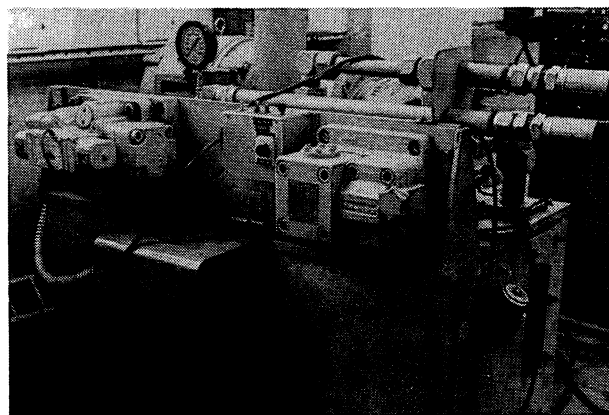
Crosscut shearing assembly; (a) carriage guides, (b) knife carriage, (c) hydraulic cylinder, (d) ring transducer.
